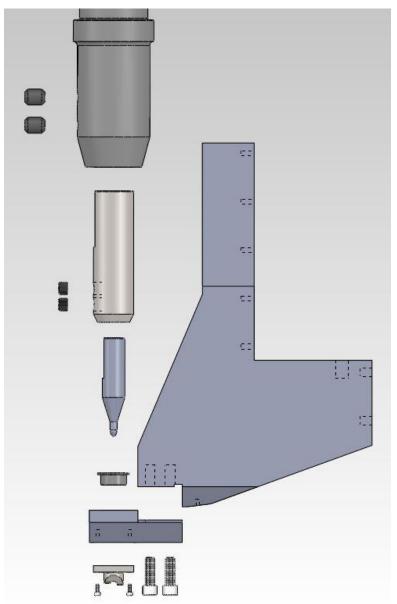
Exploded view of the welding components and their fastening elements
